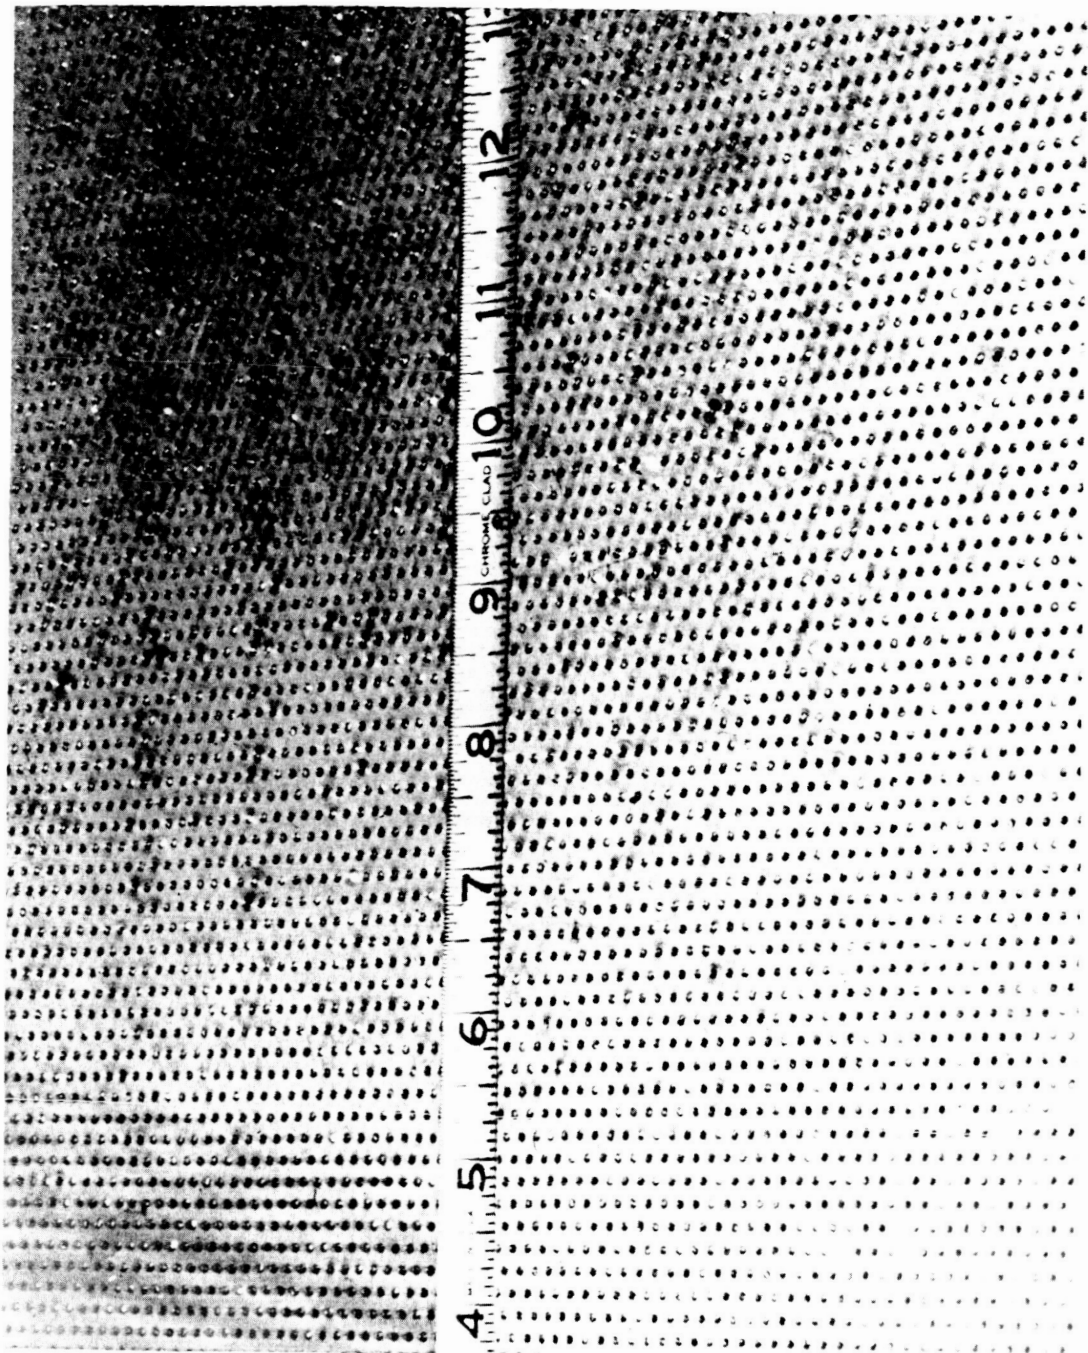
VIEW OF A3J INLET RAMP FACE SHEETS SHOWING SOME OF THE THOUSANDS OF HOLES DRILLED IN RAMP AFTER ADHESIVE BONDING
